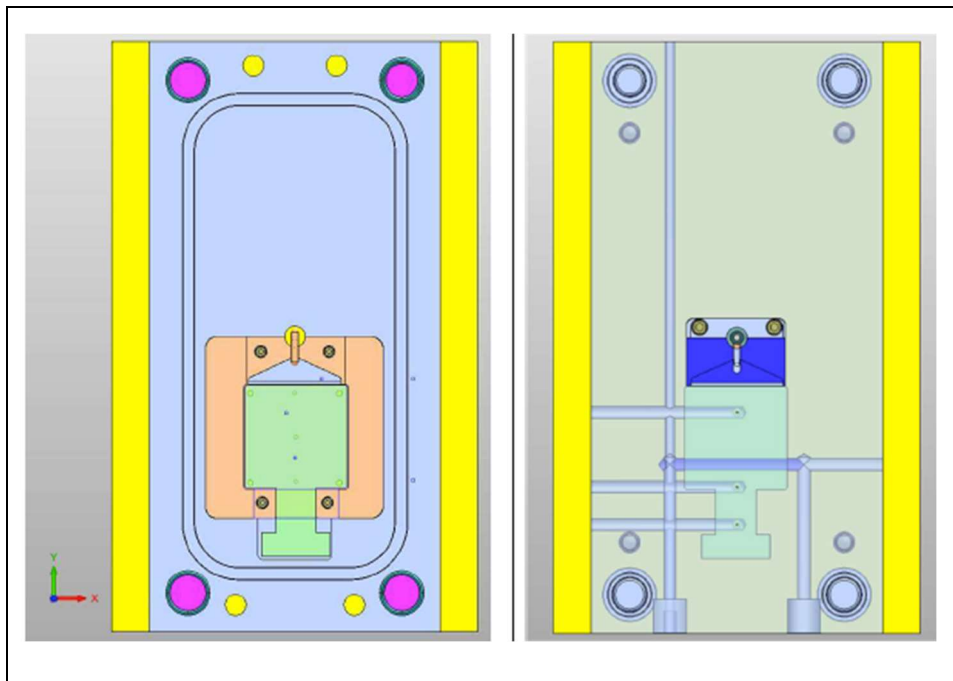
3D CAD file of the injection moulding used during the initial trials.
